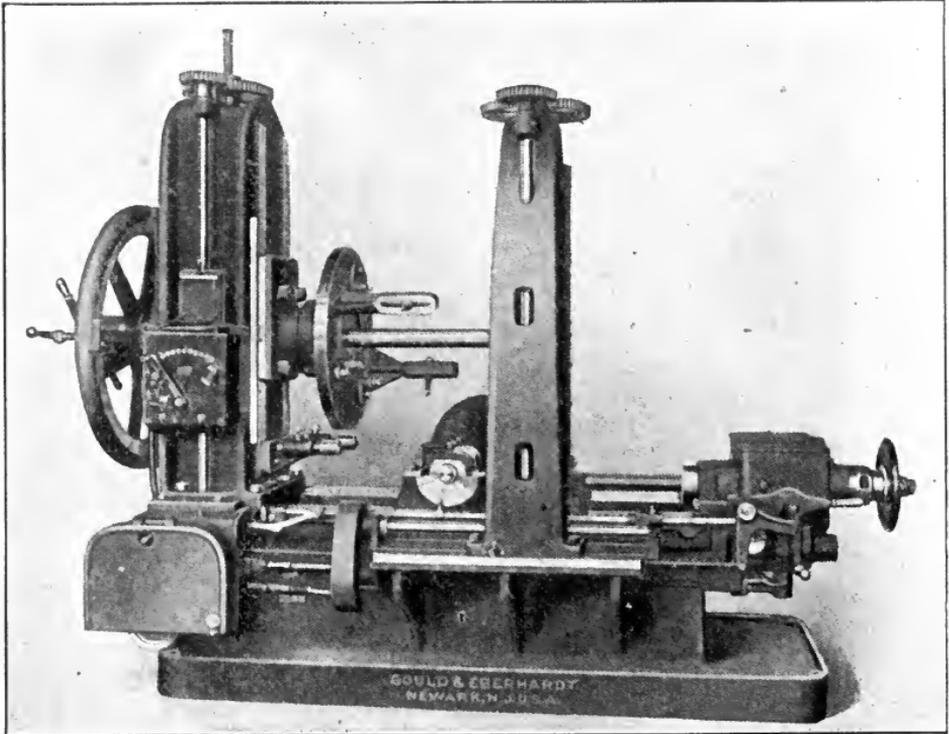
"New Type" Gear-Cutting Machine Entirely Automatic for Cutting Spur Gears Only
